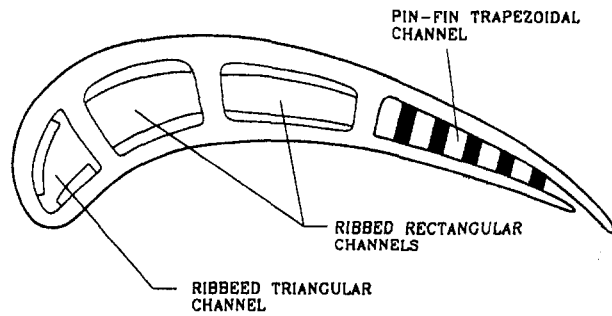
Cross-sectional view of the modern internally cooled turbine blade
